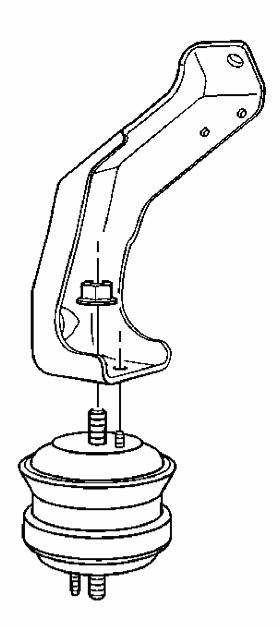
Right Engine Mount Courtesy of GENERAL MOTORS CORP.
